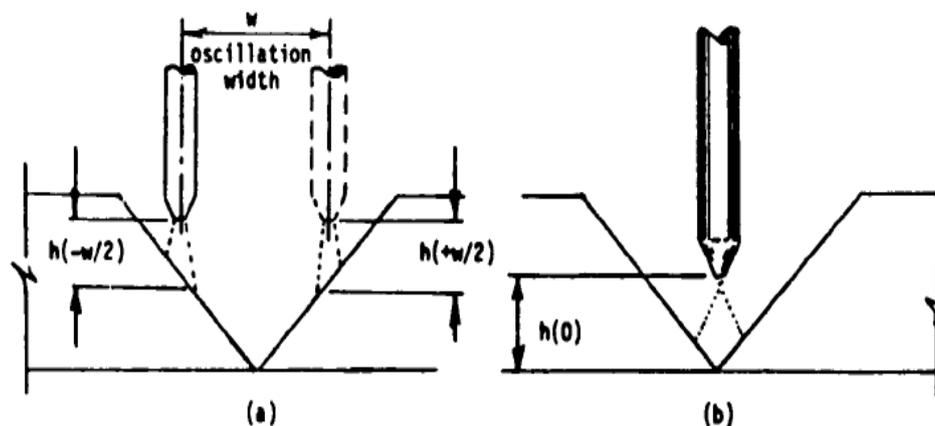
Welding Technique For Through the Arc Sensing [13].
